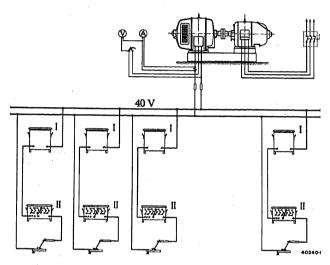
Fundamental diagram of connections for a welding plant, 40 V, allowing of welding on several sites at once, with ohmic-inductive welding current regulators.
